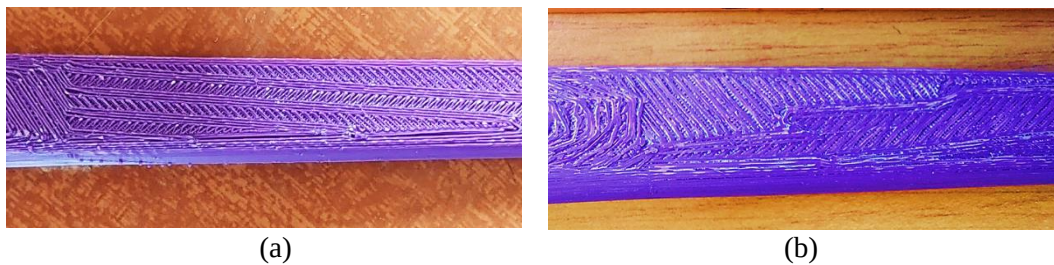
Surface finish of the test blade after 3D printing (a) and after it has been sanded down (b)
